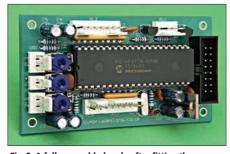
A fully assembled p.c.b. after fitting the connectors and the micro-controller i.c.
